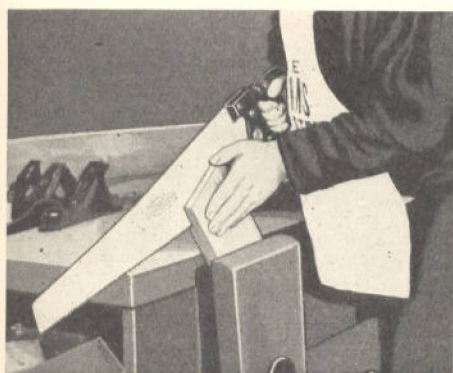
Making depth cut of half lap joint with Atkins SILVER STEEL Hand Rip Saw No. 53.
